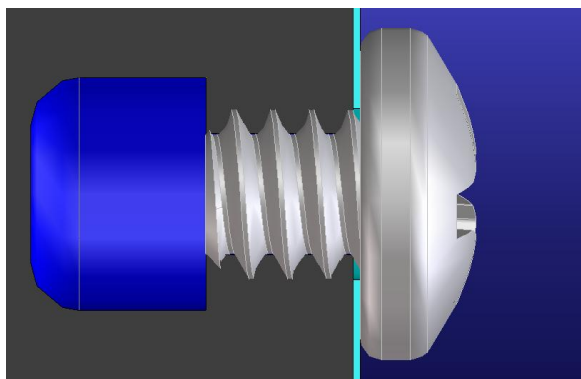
Side mount OEM hole, 6-32UNC x 1/8" (3.8 threads engagement)
